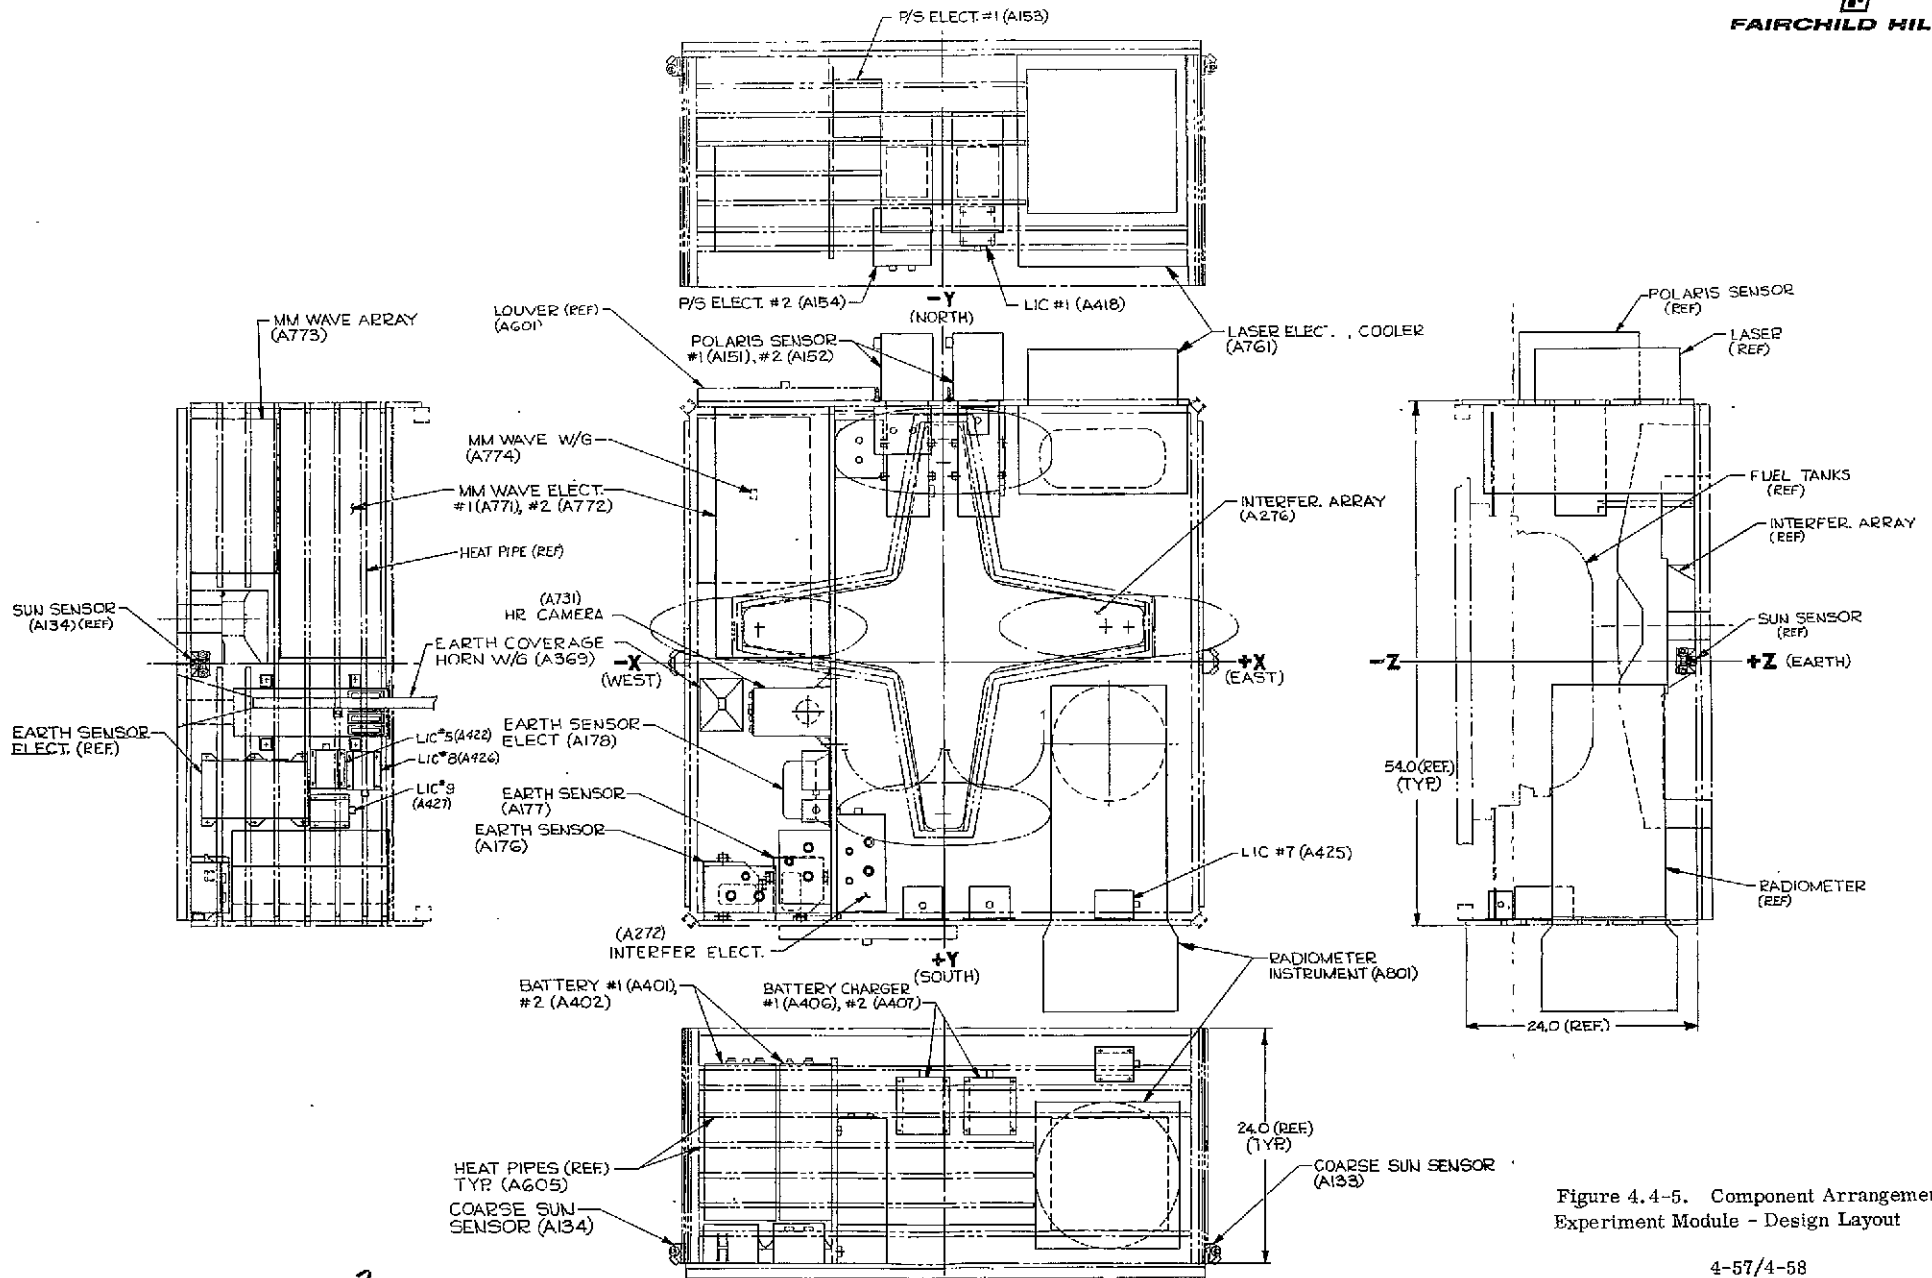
Component Arrangement - Experiment Module - Design Layout
